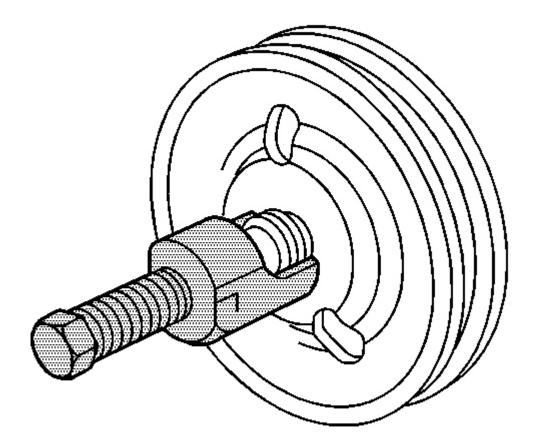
View Of Power Steering Pump Pulley Remover Courtesy of GENERAL MOTORS CORP.
